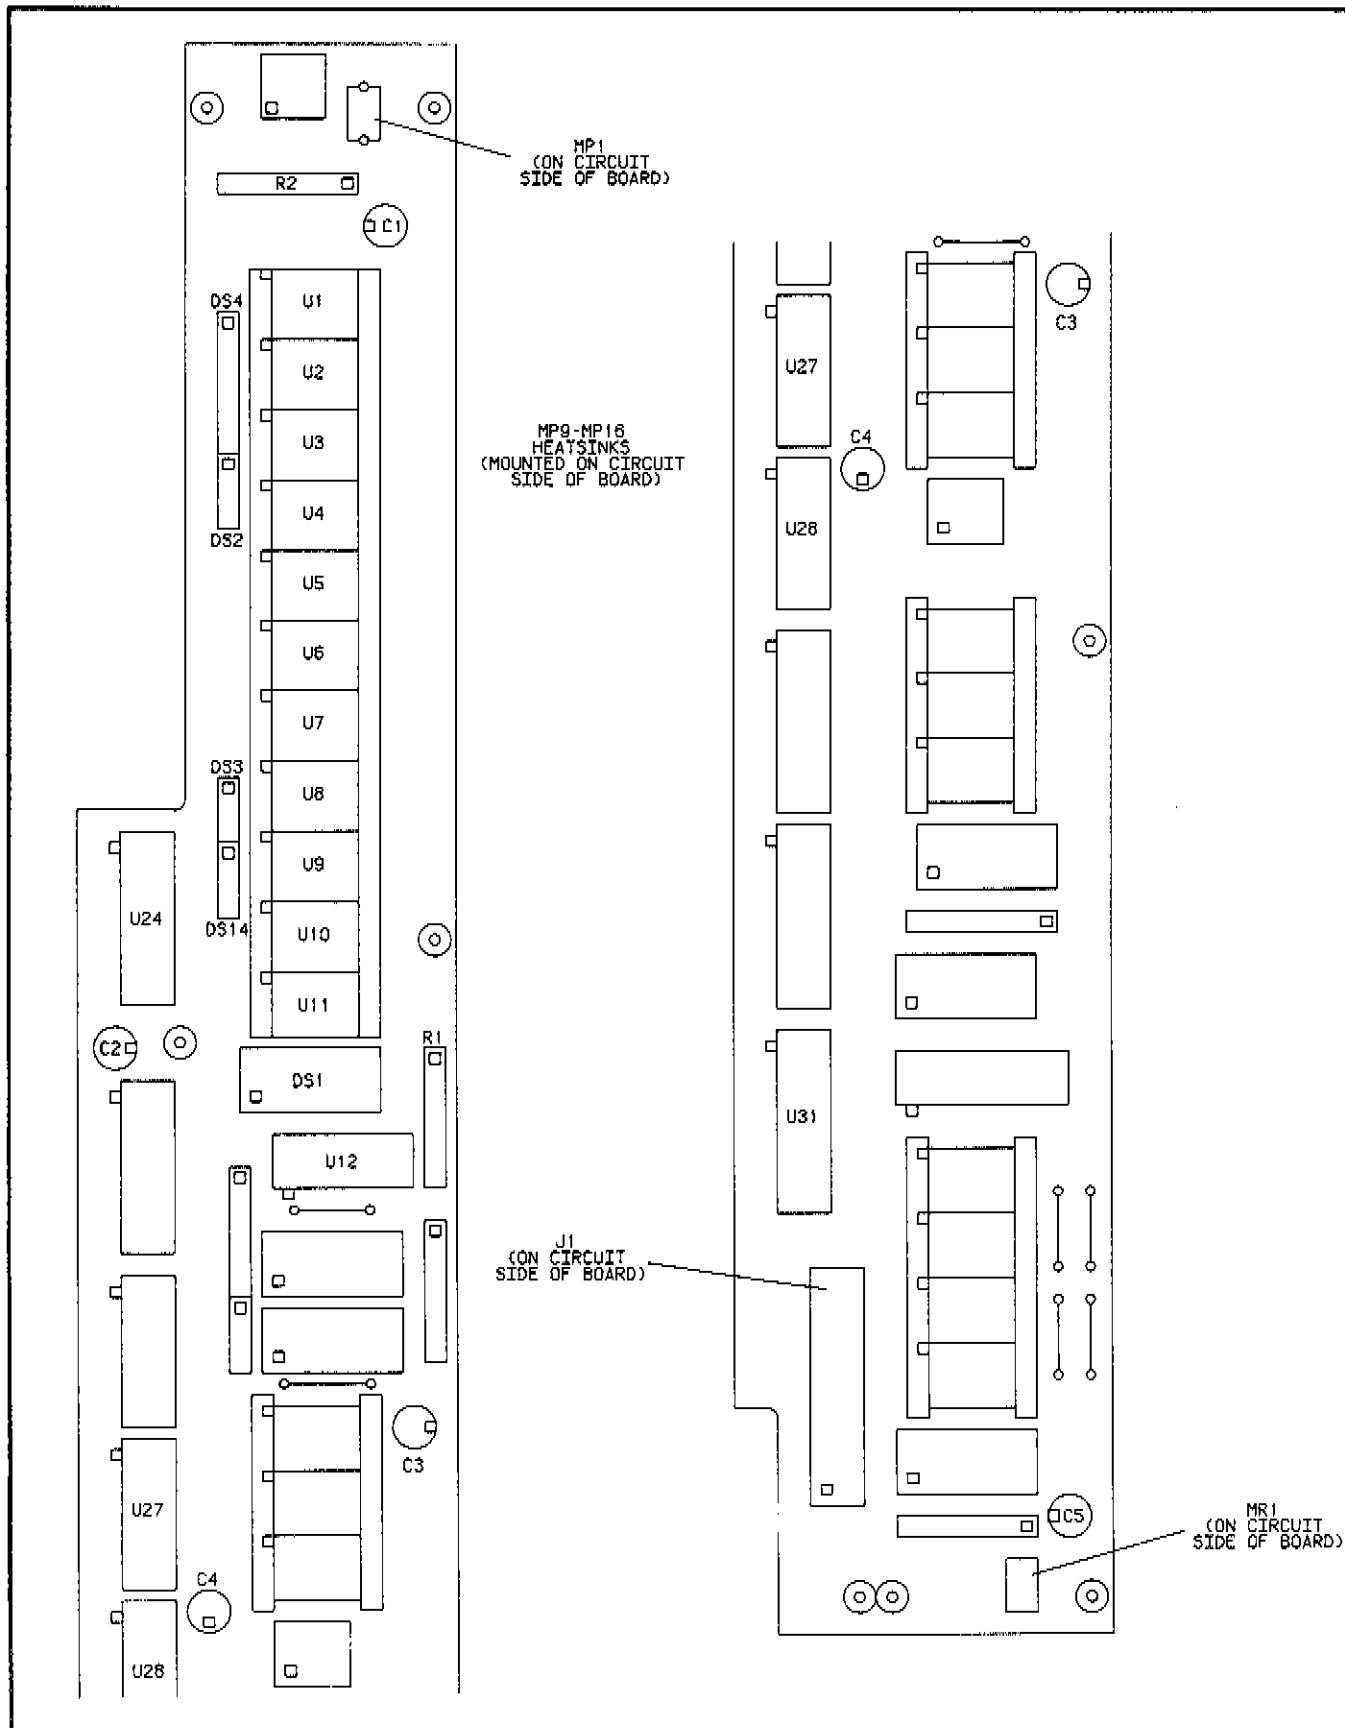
P/O A1A1 Display Assembly Component Locator
